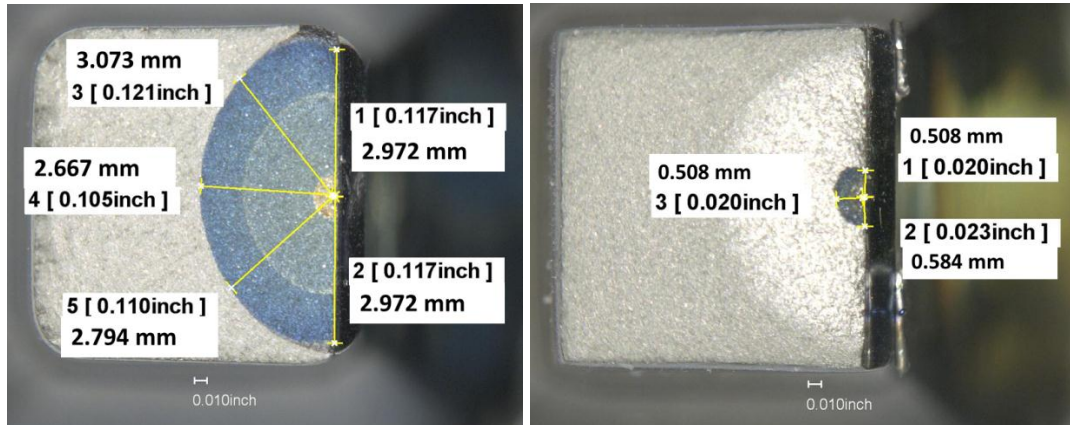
Examples of fracture surfaces which do not display evidence of crack tunneling
